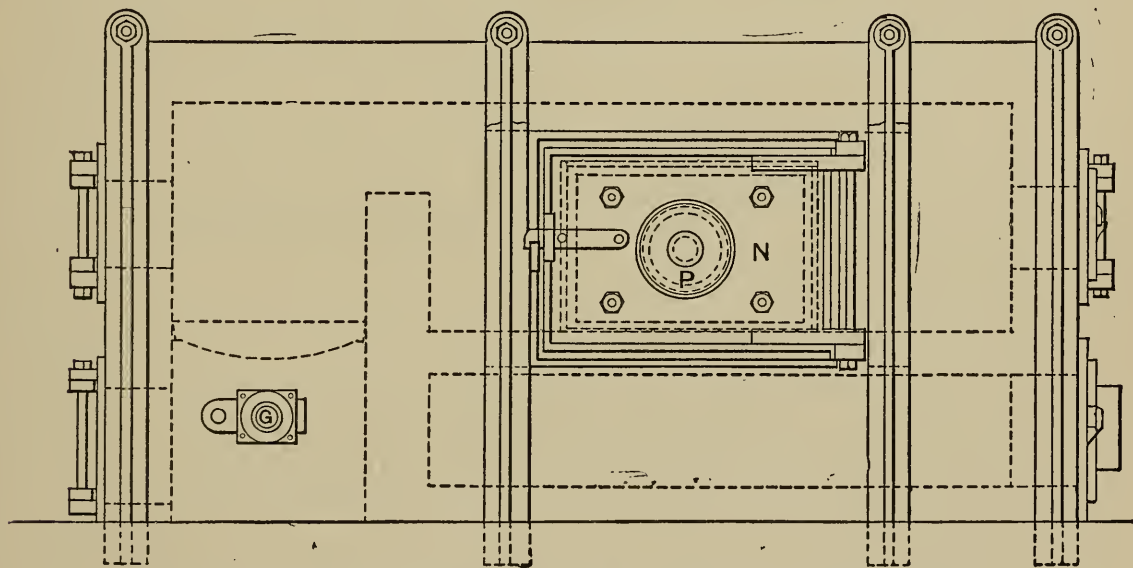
Side Elevation of Annealing and Case-hardening Furnace.
